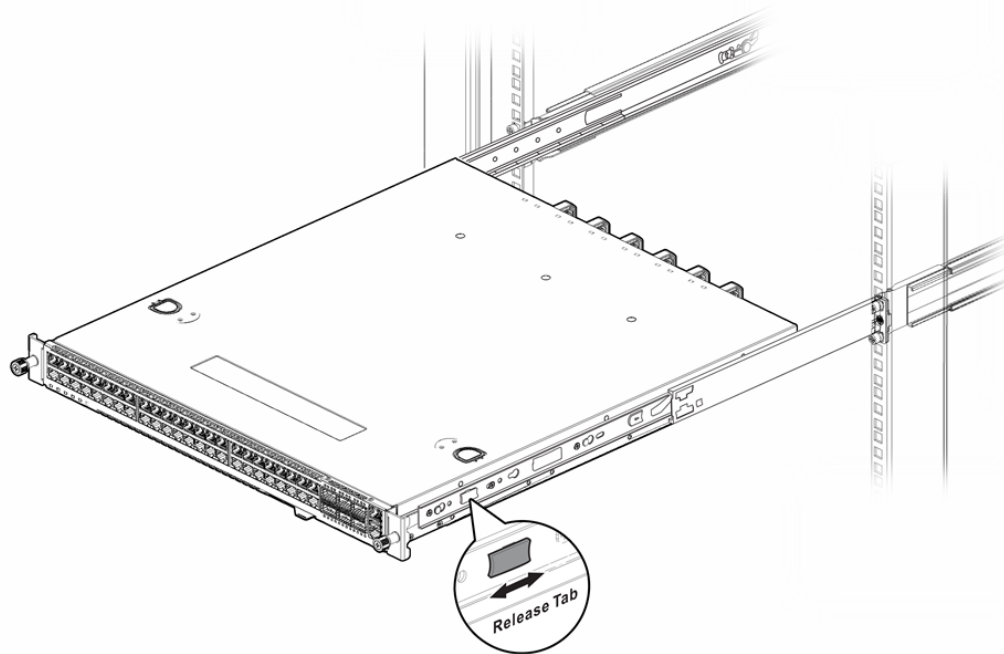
Pushing the Mounting Brackets into the Rail Assemblies
